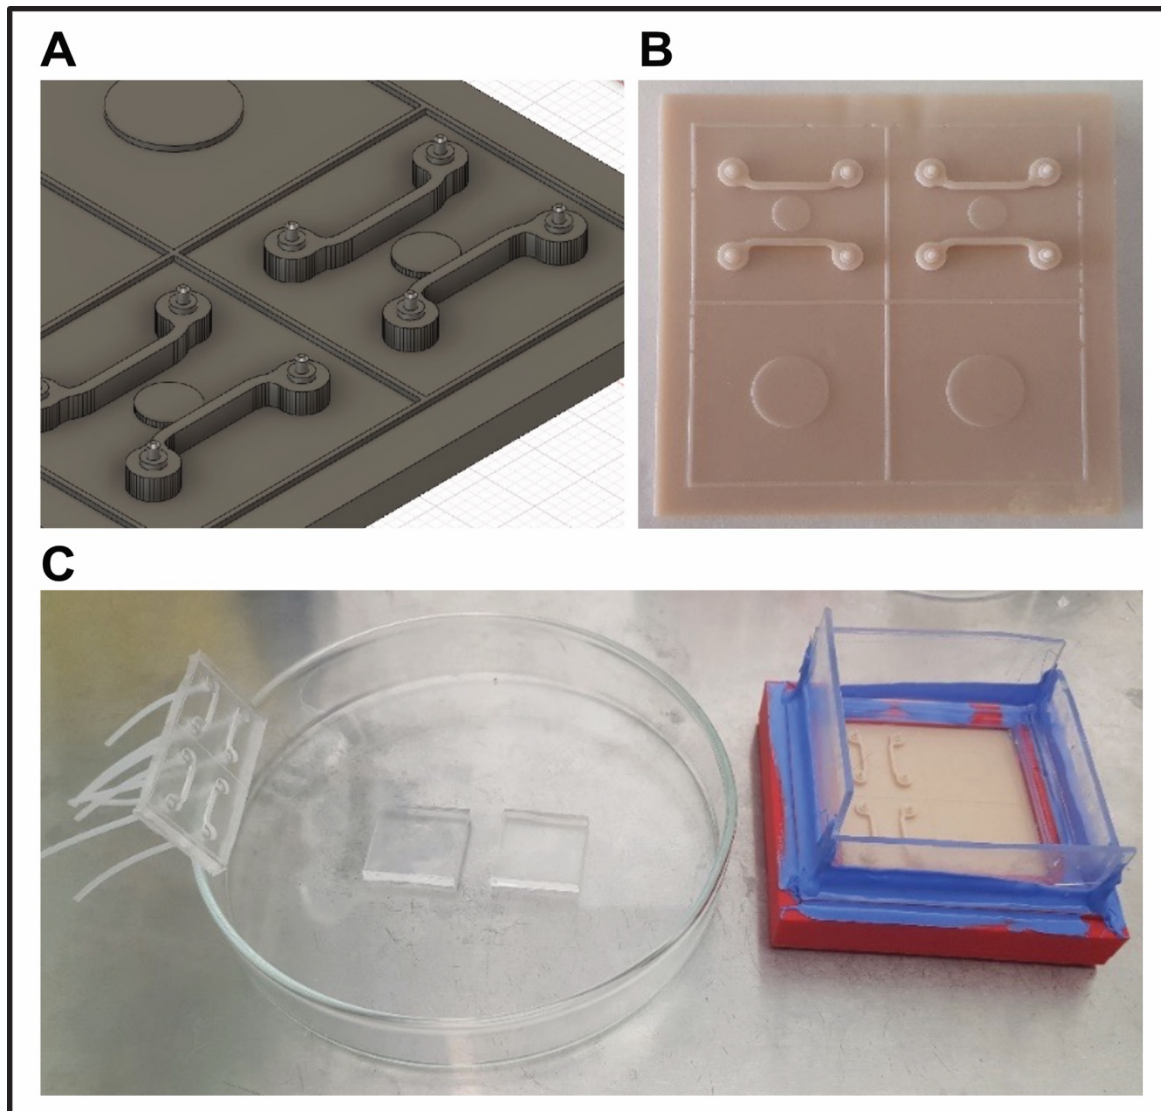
Direct embedding of tubing to allow secure connection. A) Design modification adding pillars to the mould to support the tubing. B) 3D printed mould after design modification. C) Embedded tubing in the PDMS chip after assembly.
